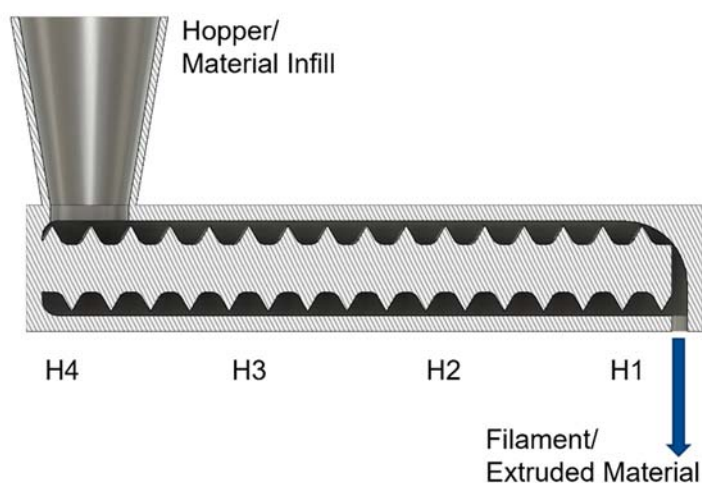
Sketch of the cross-section of a single-screw extruder. Design is based on the 3Devo Composer 450.
